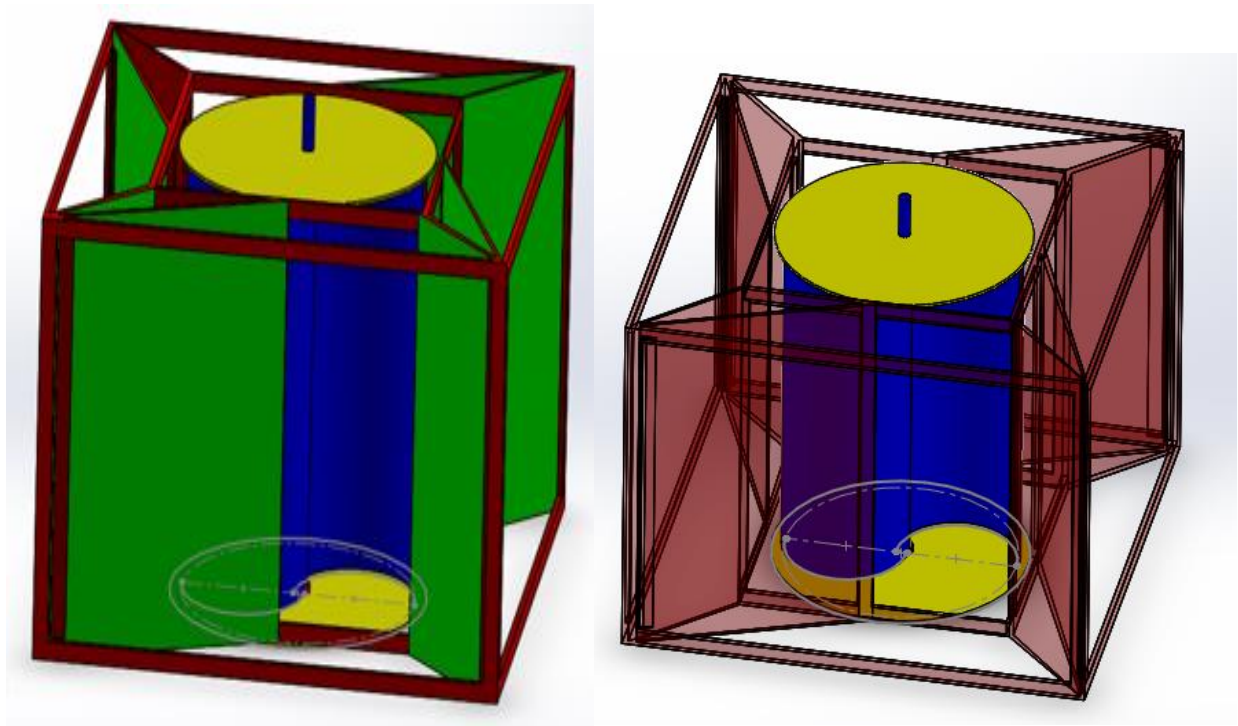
8: Assembled Savonius turbine with longer air-jet mechanism
